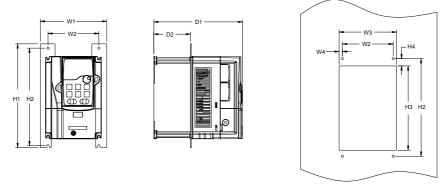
Flange mounting diagram for 380V 0011-0090 models
